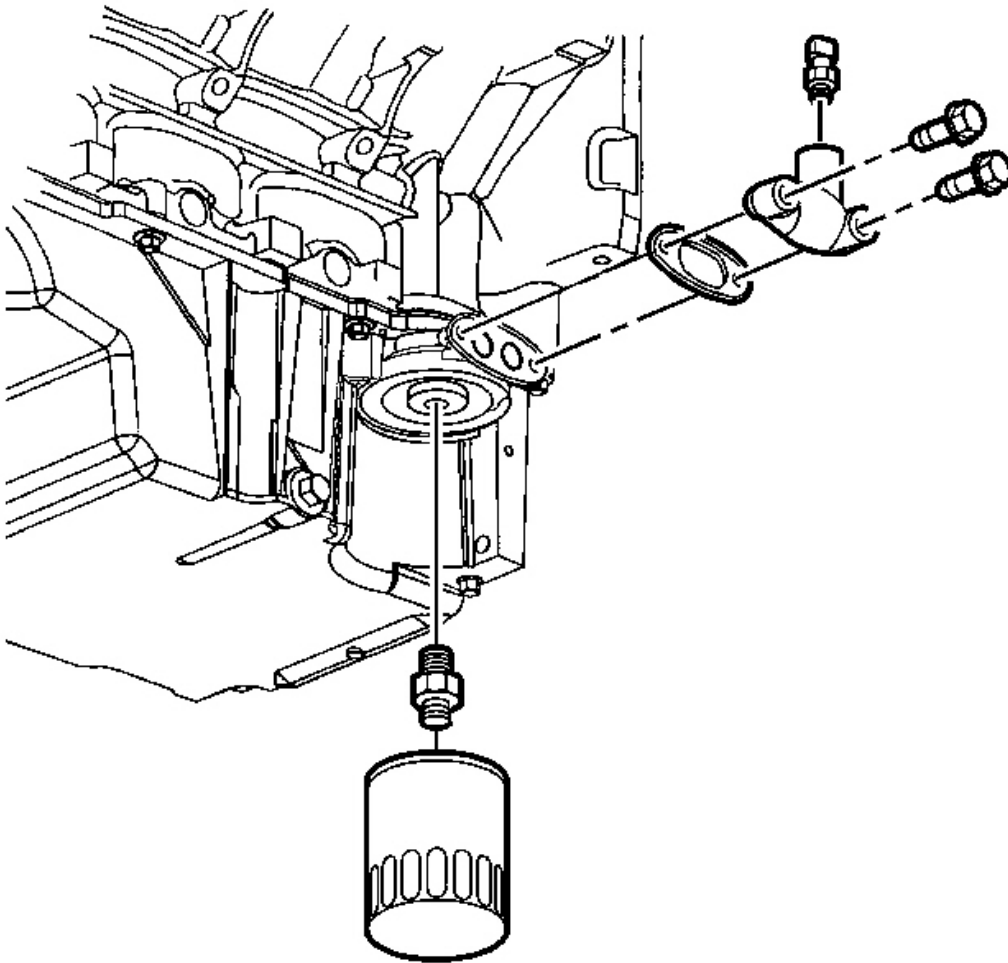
Oil Pan Cover Bolts, Cover & Gasket
